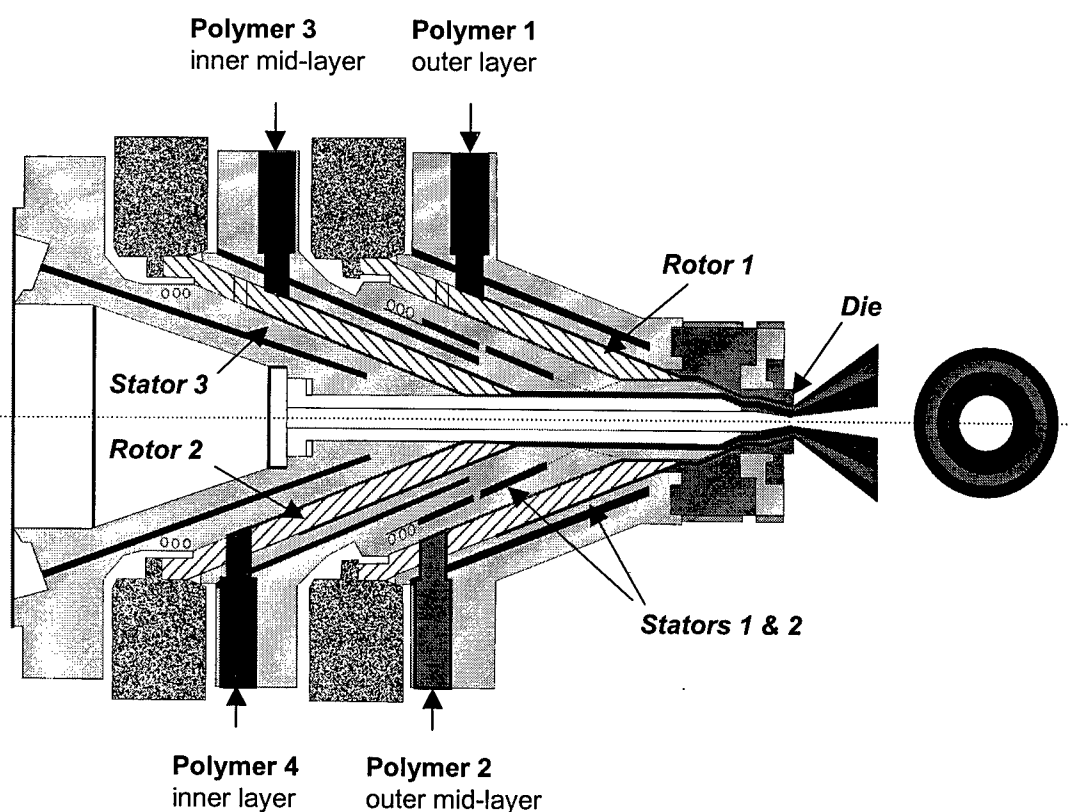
Schematic view of a two-rotor (four-layer) cone extruder.
